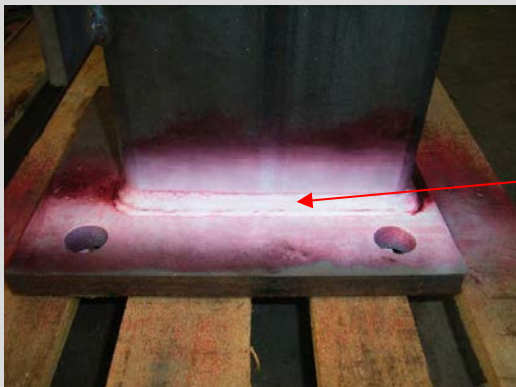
(b) – Fillet weld throat thickness
